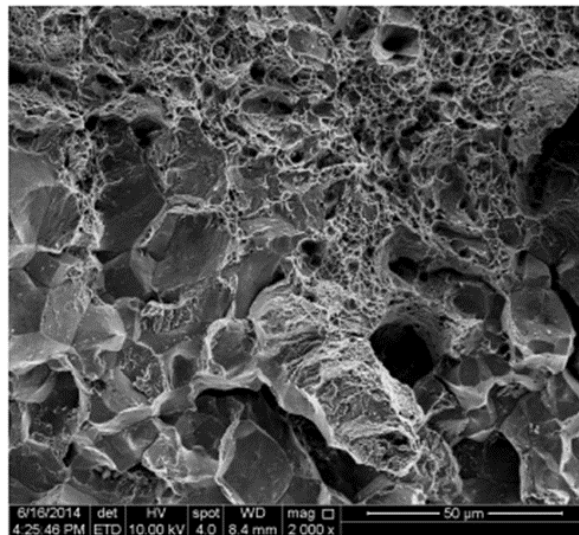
Fracture surface with brittle surface showing hydrogen-induced cracking and ductile surface showing the final failure using electron microscope [1].
